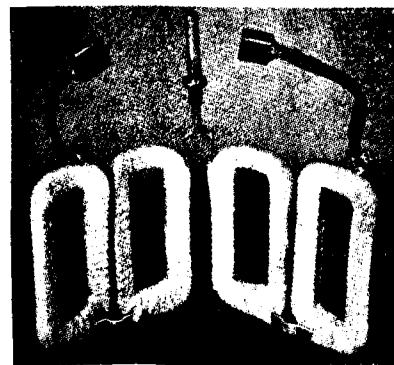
Field coil winding for an automobile starter, comprising four coils of electrically pure aluminium drawn strip 0.25 in. wide, 0.045 in. in thickness with rounded edges. Paper interleaving is used for insulation; aluminium/aluminium and aluminium/copper joints are involved, made principally by resistance welding methods. (Courtesy of Joseph Lucas, Ltd.)
